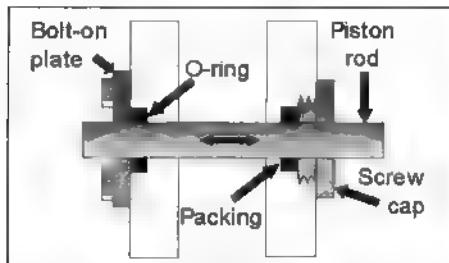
Left, an O-ring held in place with a bolt-on plate; right, packing held with a screw-in cap.
